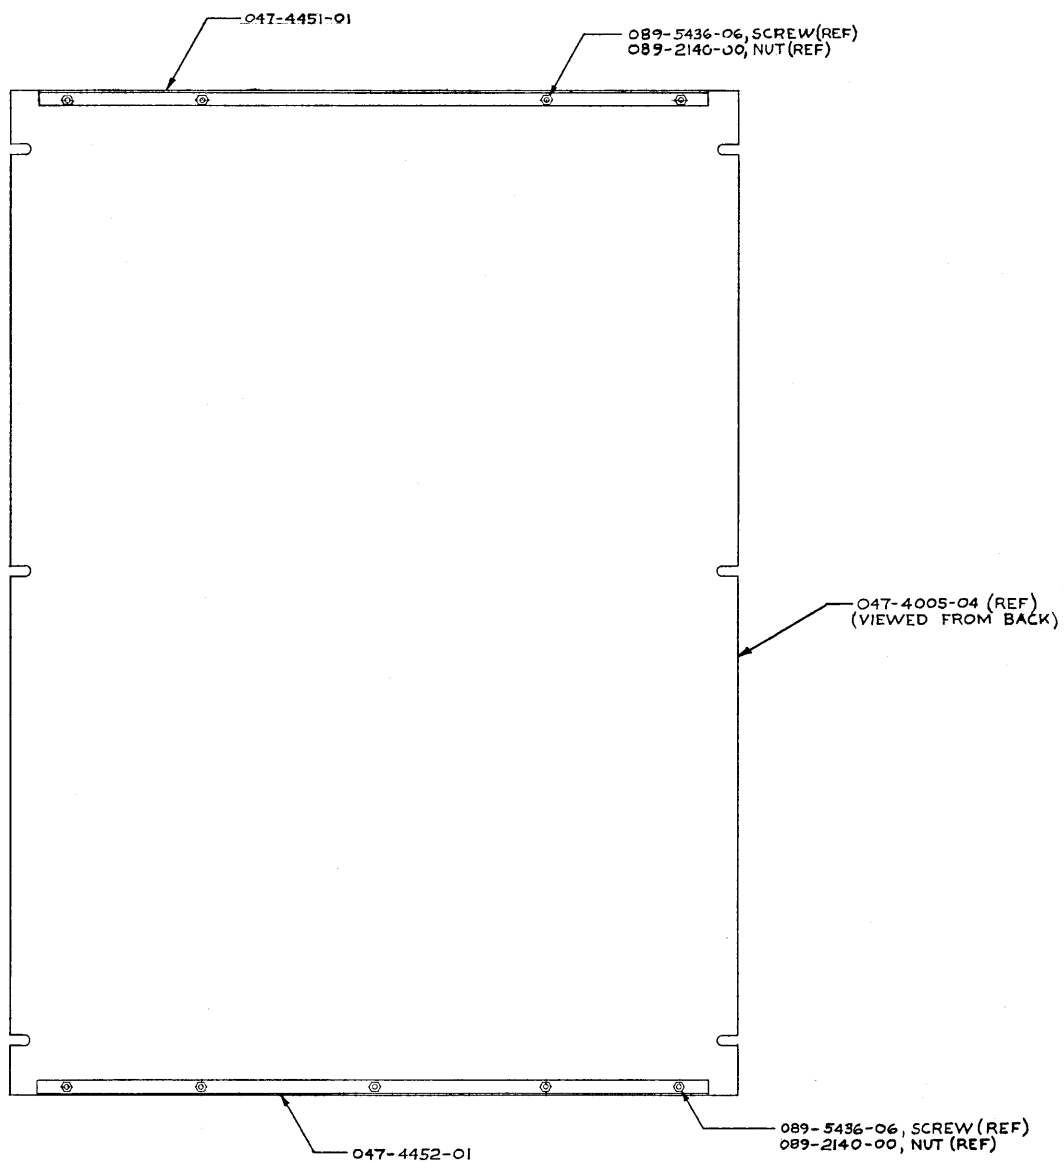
TEST PANEL ASSEMBLY (SHT 3)
